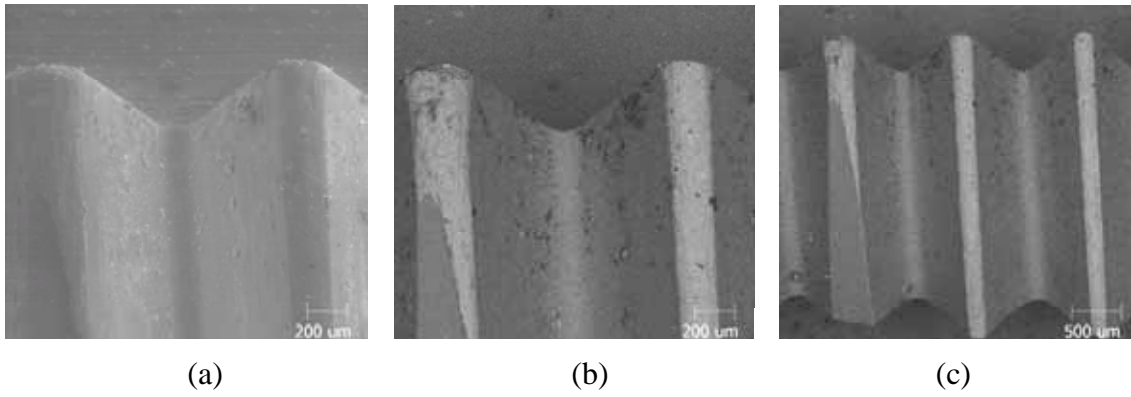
SEM views showing the wear for the TiN coated tool used under MQF condition: a) secondary electrons technique; b) and c) scatter electrons technique.
